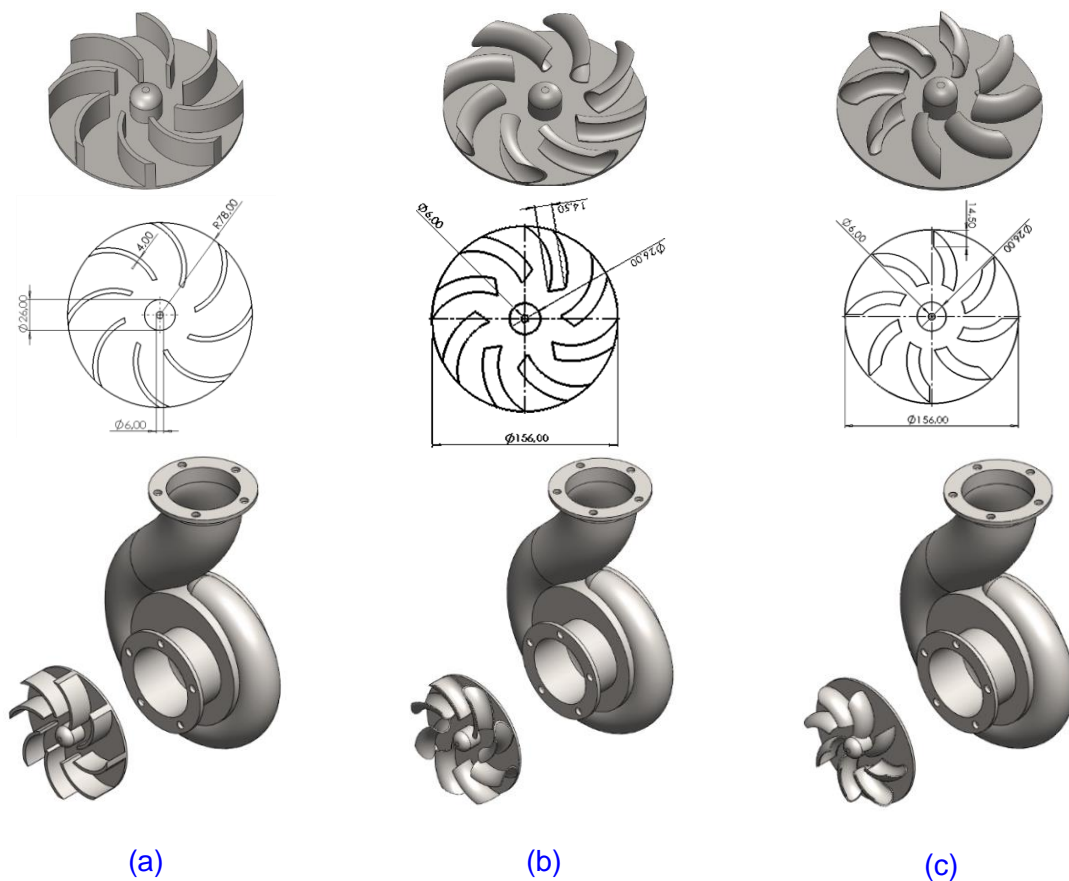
Centrifugal pump impellers. (a) original impeller, (b) concave impeller, and (c) convex impeller
